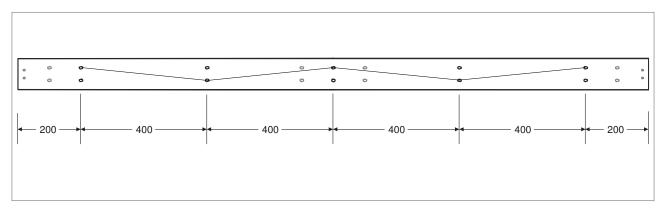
Hole pattern for vertical wall and ceiling mounting
